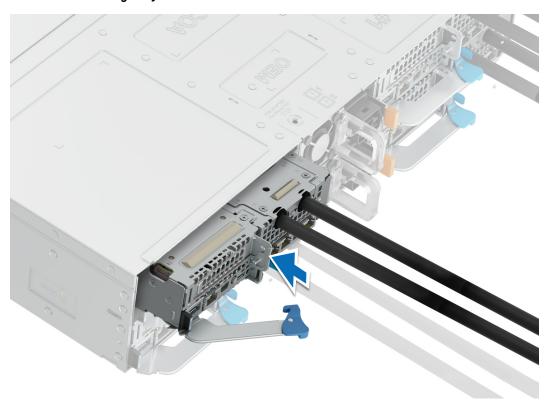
Insert the sled until the edge of the sled handle touches the edge of the enclosure chassis
